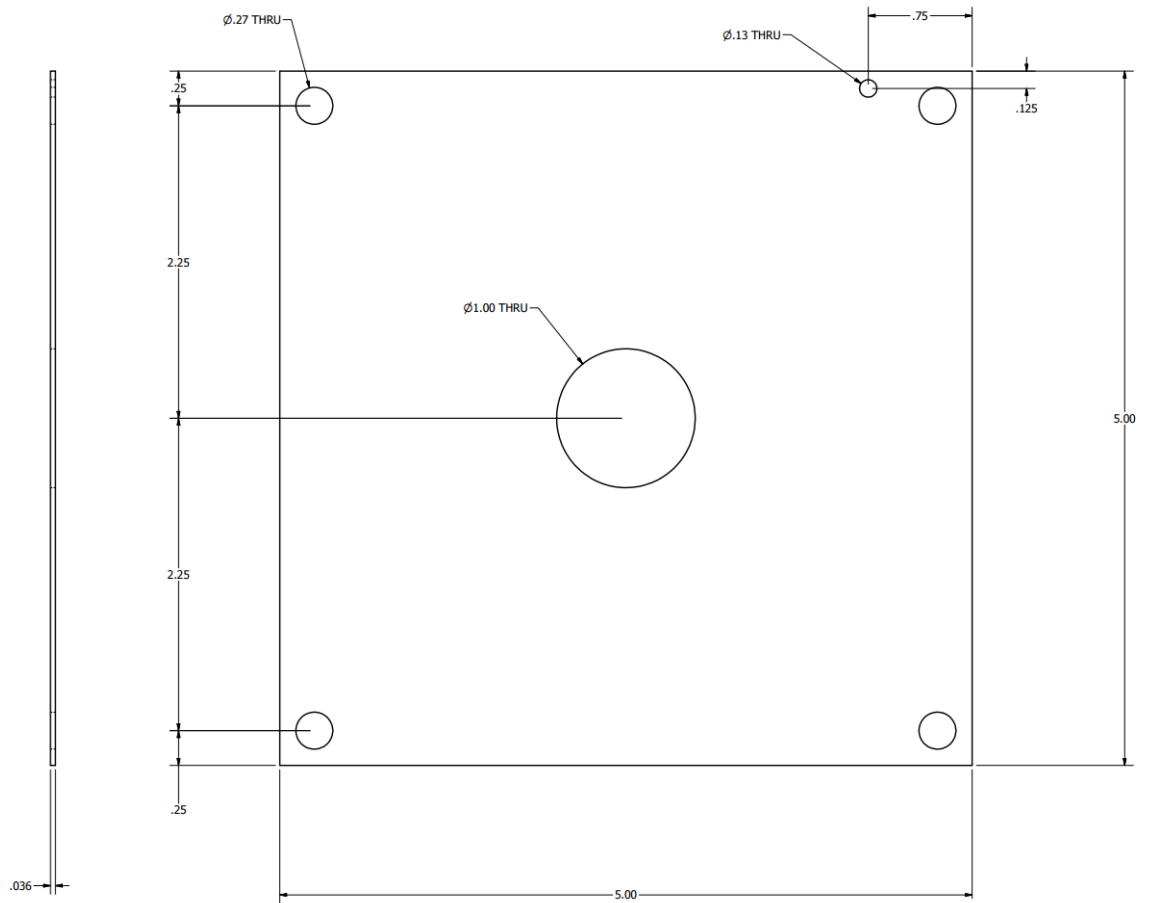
Extraction Plate Assembly - Extraction Plates
